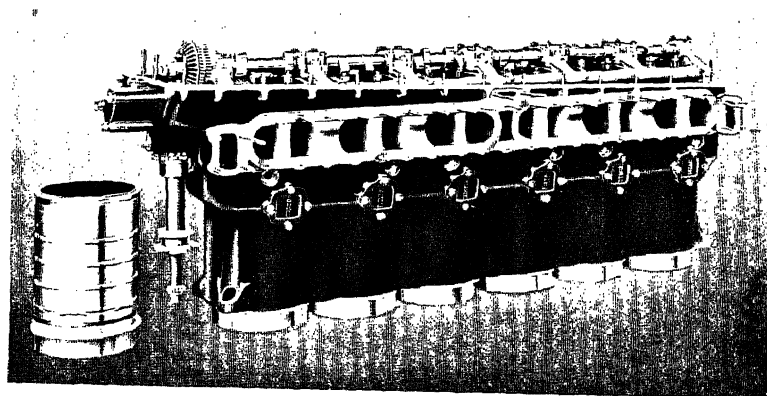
Cylinder block and one cylinder barrel of "Merlin" engine
